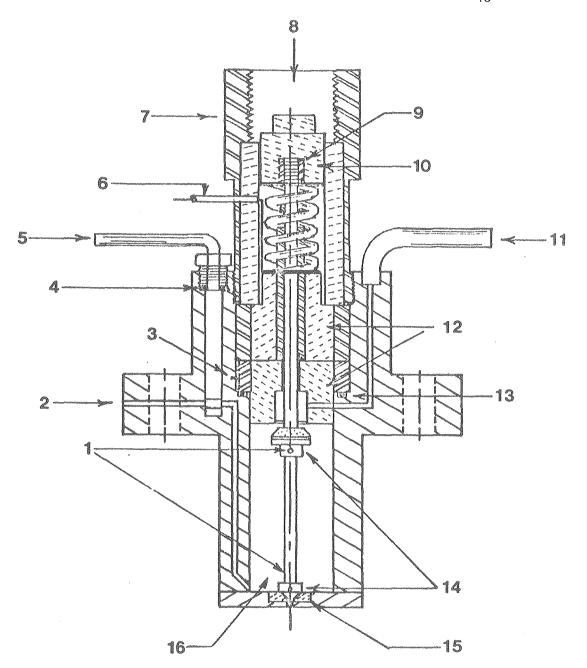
Combustion jet igniter; 1 - valve rod, 2 - purge outlet, 3 - alignment slot and key, 4 - packing gland, 5 - shut off vlave, 6 - high voltage lead, 7 - solenoid support, 8 - solenoid plunger, 9 - rod supporting nut, 10 - Macor bonnet, 11 - gas inlet, 12 - Macor guides, 13 - 0 ring, 14 - valves, 15 - tapered orifice, 16 - combustion chamber.
